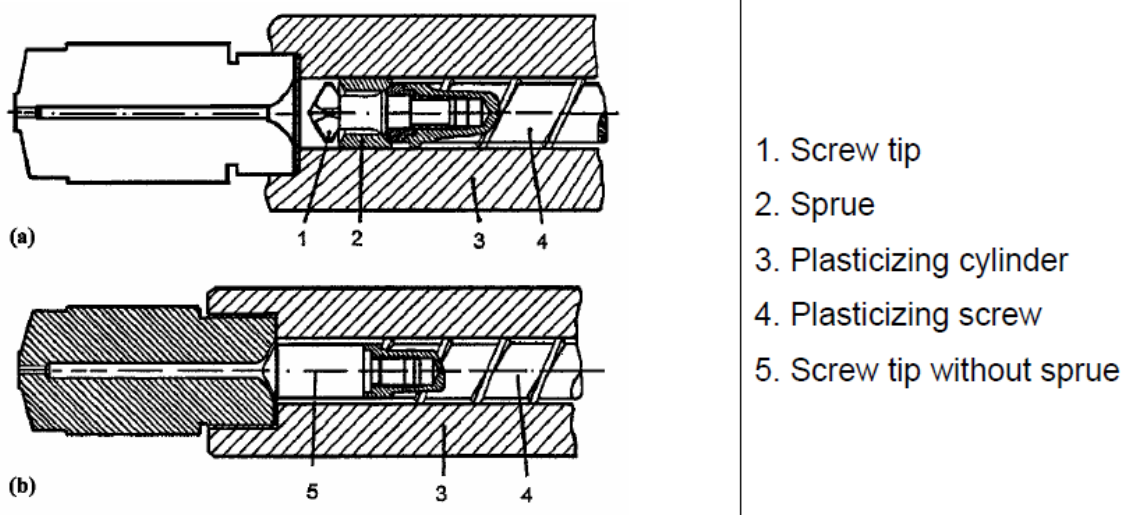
Schematic diagram of a screw type injection molding machine.
